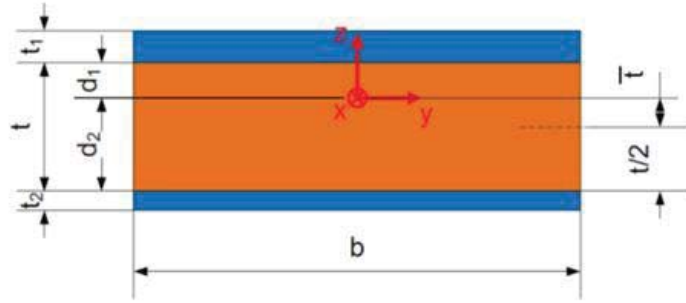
Cross section of piezoelectric bending actuator with three layer setup
